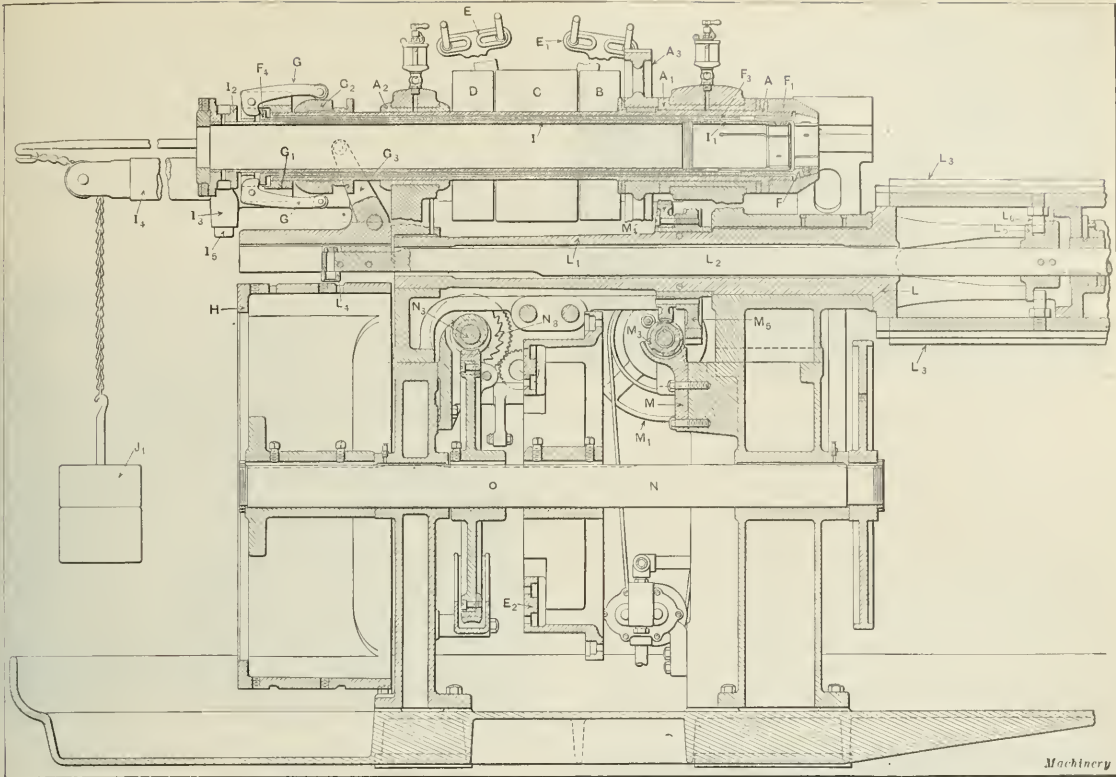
Sectional View taken through Gridley Single-spindle Automatic Turret Lathe, showing Spindle Construction, Turret Construction and Operation of Main Cam-shaft. Note that Turret is swung around out of Correct Position to show Section
